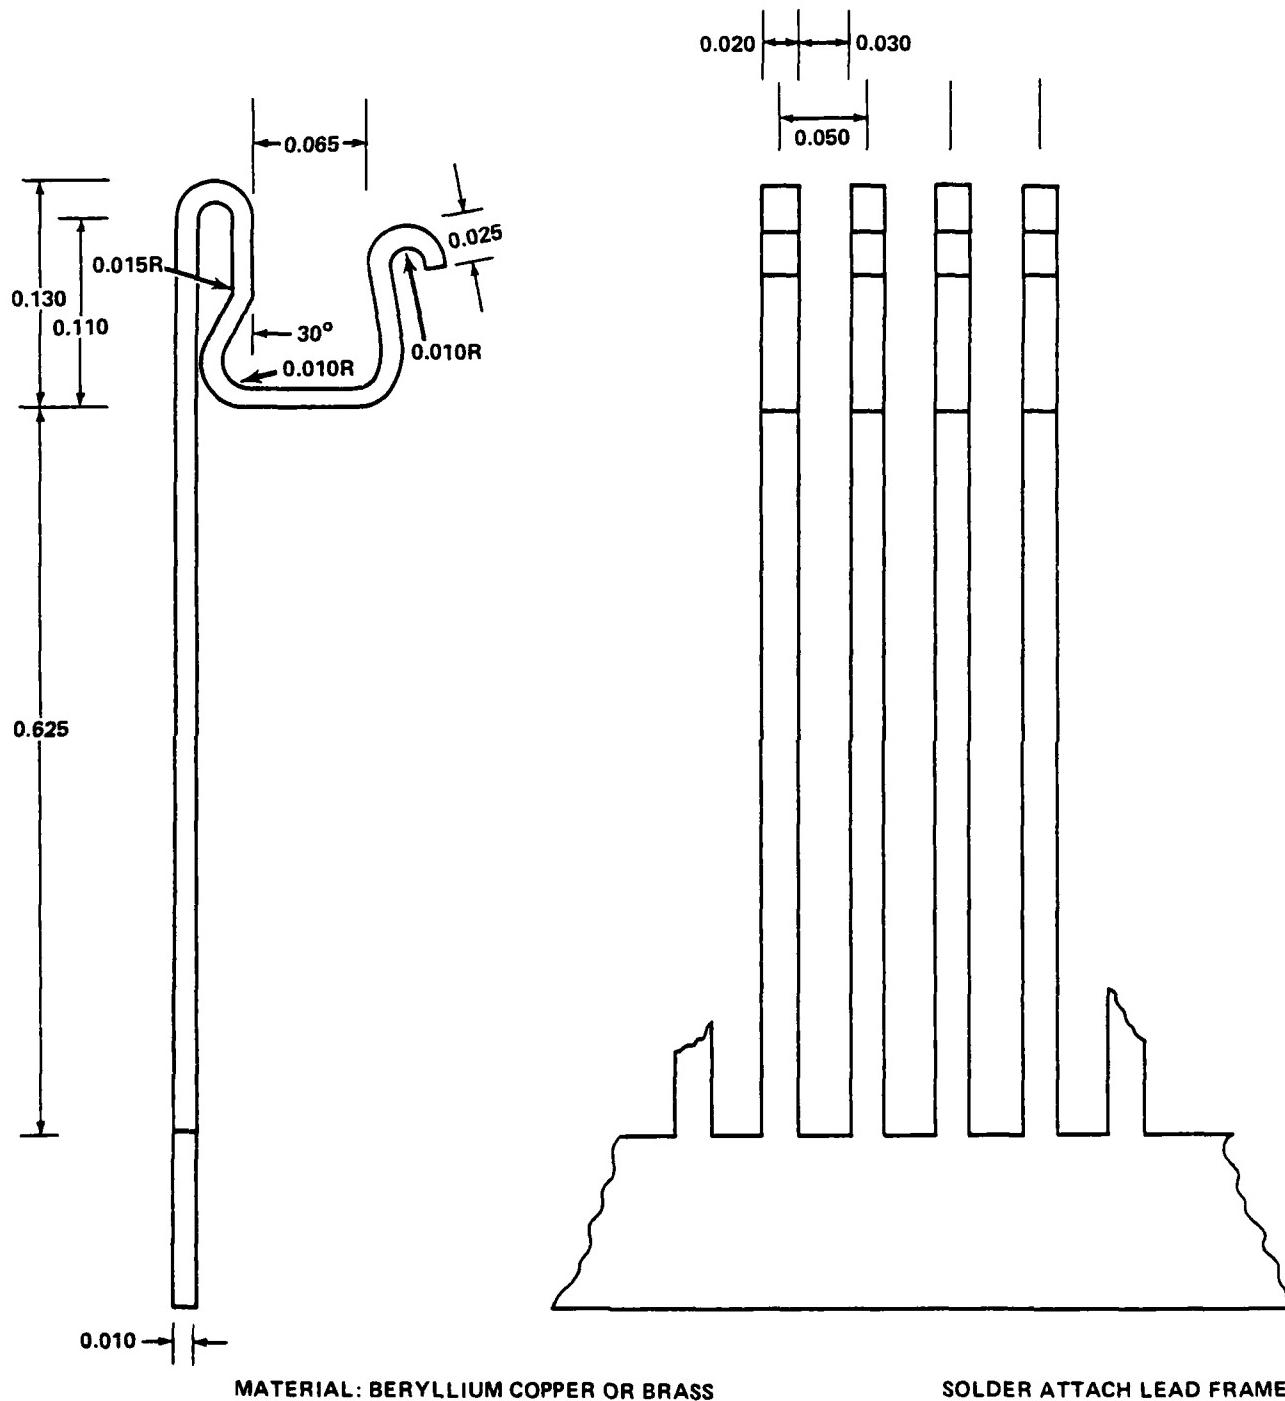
SOLDER ATTACH LEAD-FRAME DESIGN
